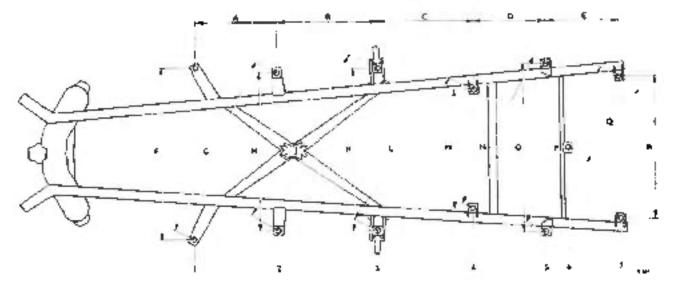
Classis frame and body checking dimensions S1 Long Wheelbase care
